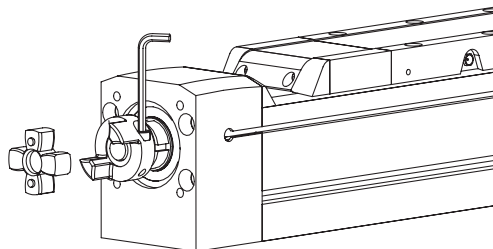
Tightening the clamping hub and depressing the elastomer insert
